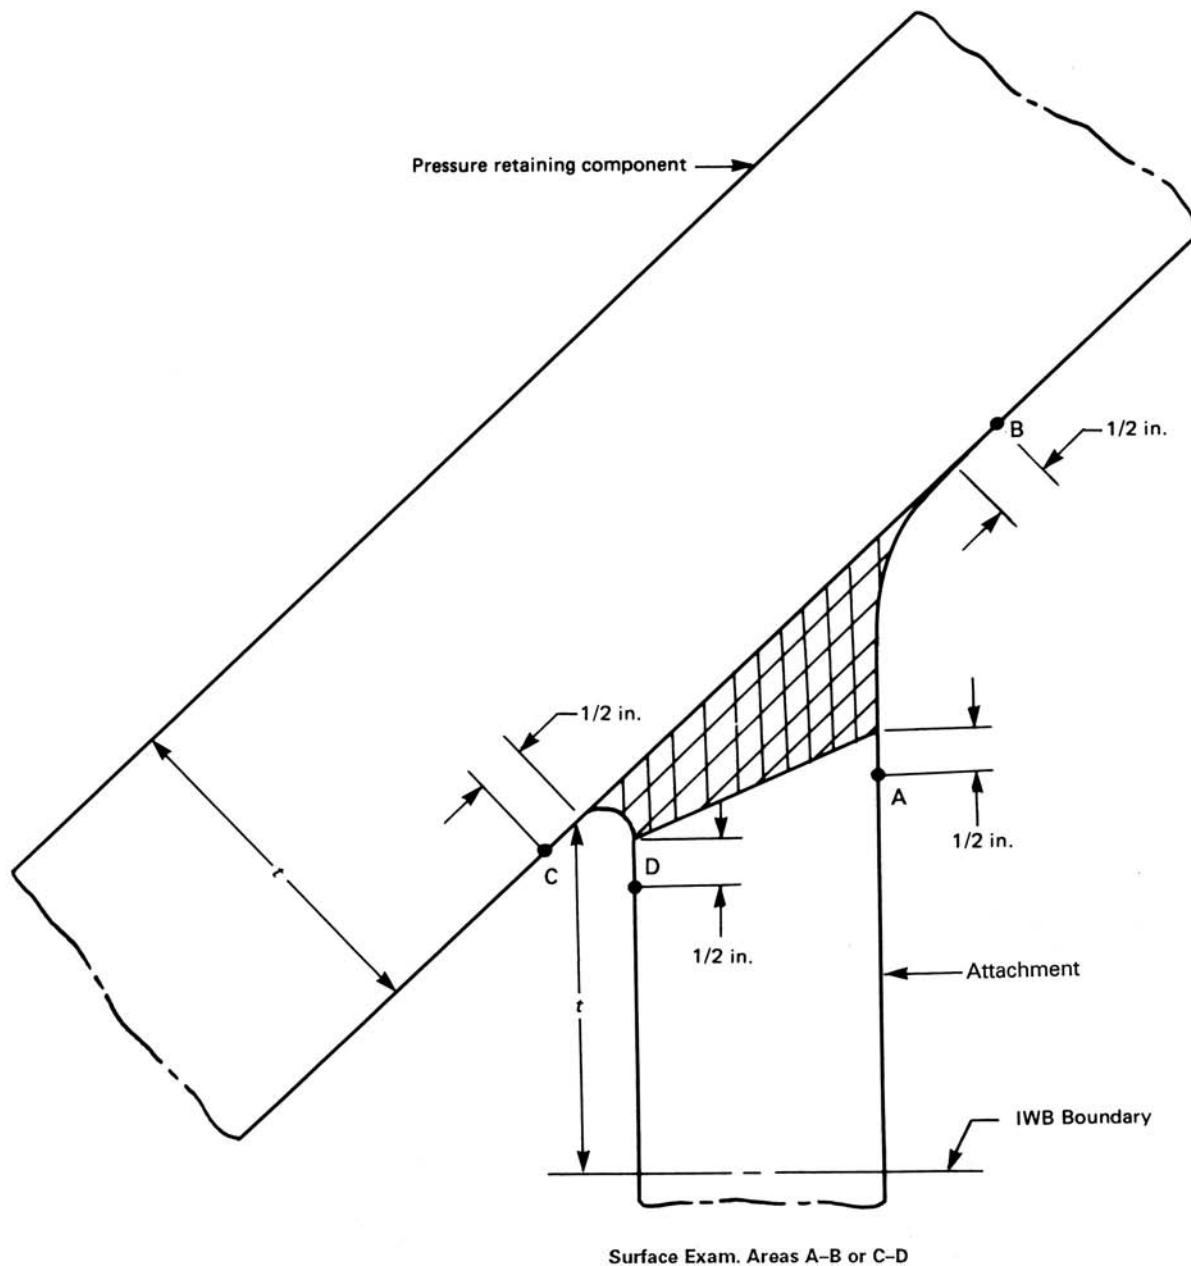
WELDED ATTACHMENT
